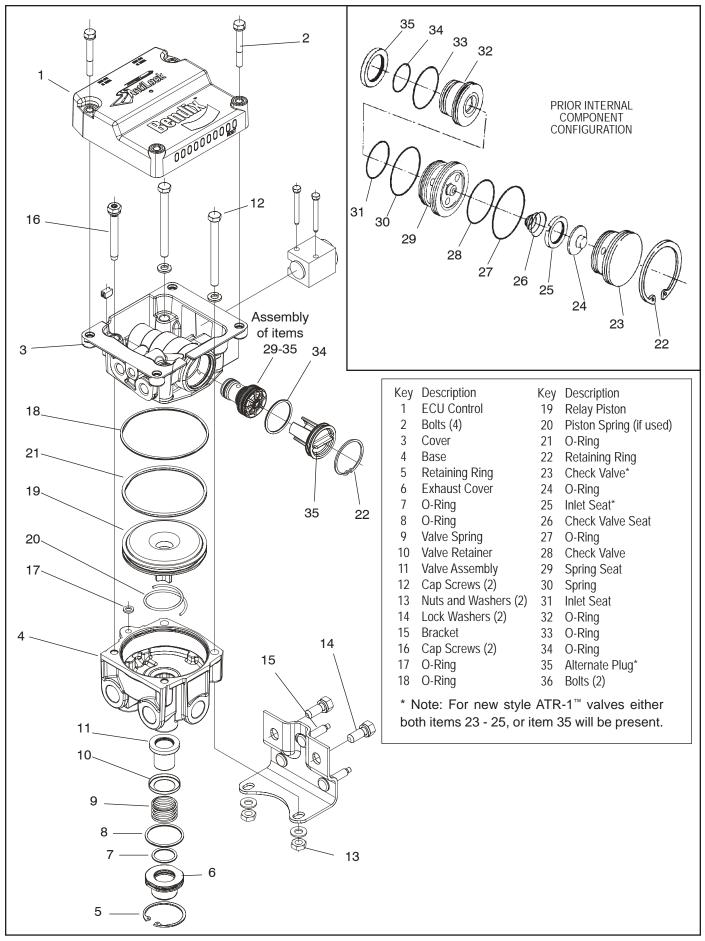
ANTILOCK TRACTION ASSEMBLY EXPLODED VIEW
